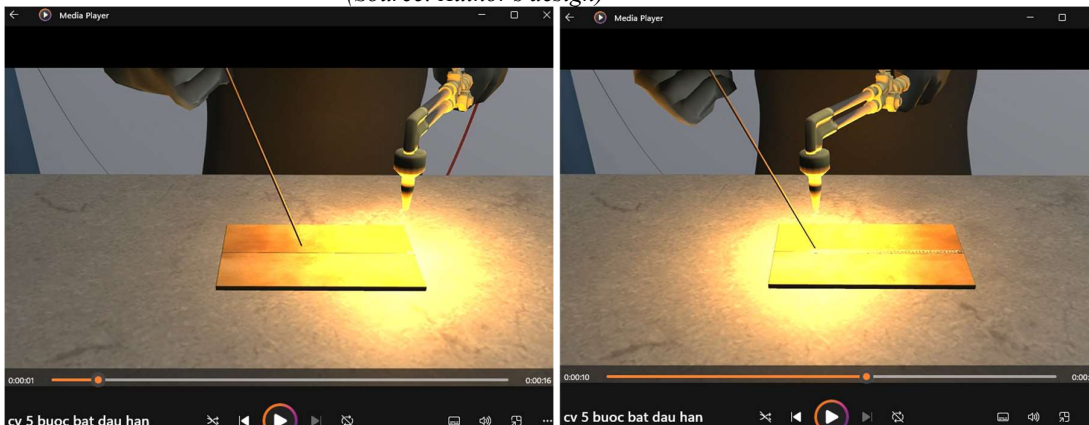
Proceeding with cutting the iron workpiece along the pre-defined cutting path
